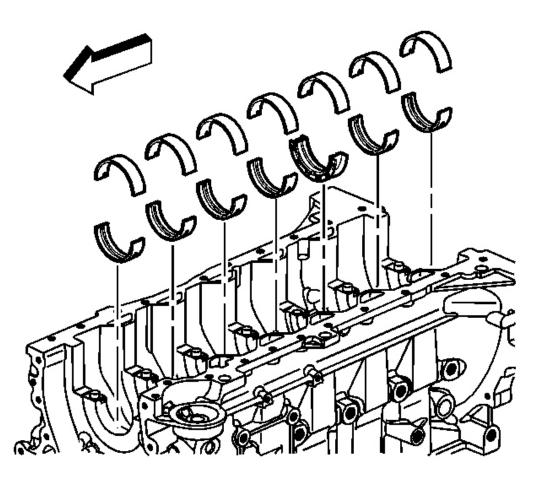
Inspecting Crankshaft Bearing Inserts Courtesy of GENERAL MOTORS CORP.
